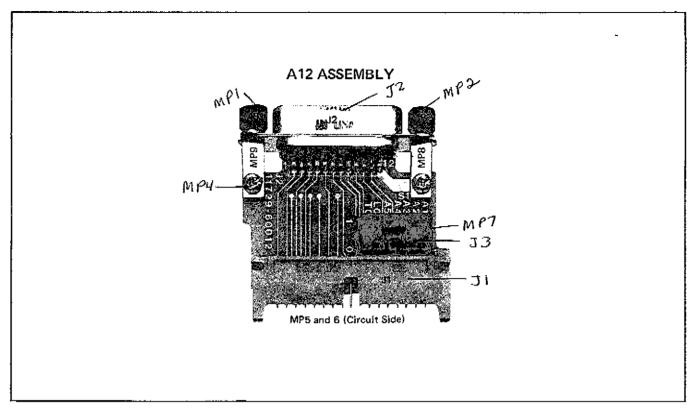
HP-iB Interconnect Board Assembly Component Locations
